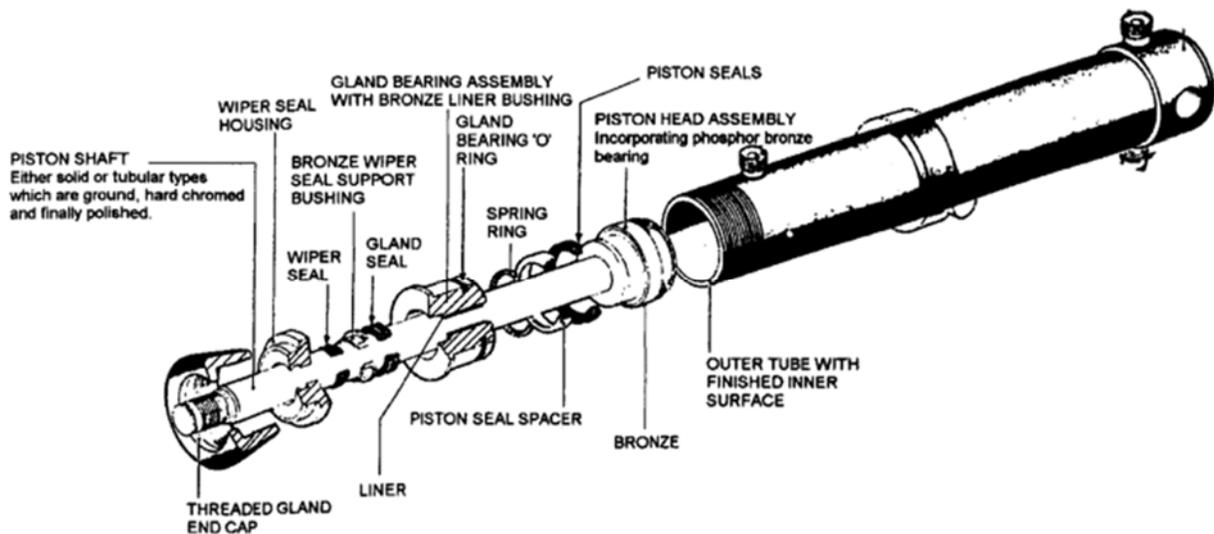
Typical double acting hydraulic cylinder
